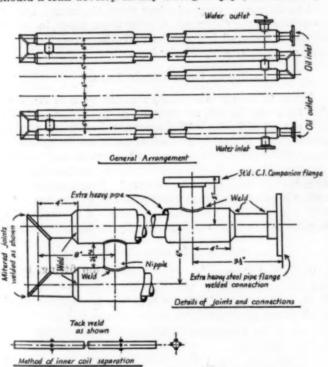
Standard Construction for an All-Welded Cotton-Oil Cooler
